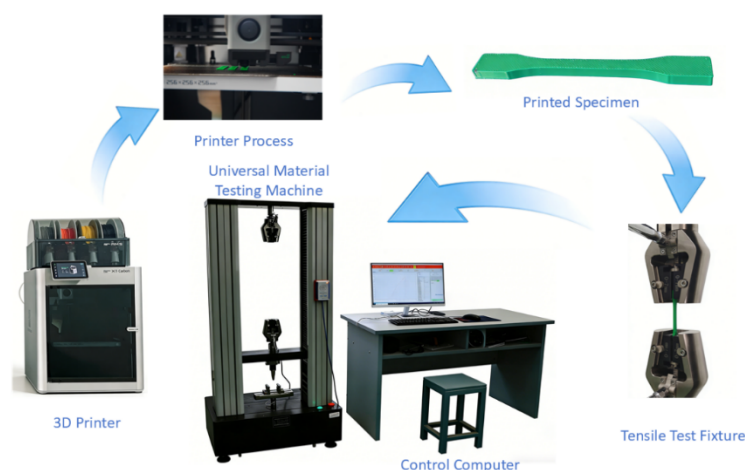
Flowchart of 3D printing fabrication and mechanical testing.
